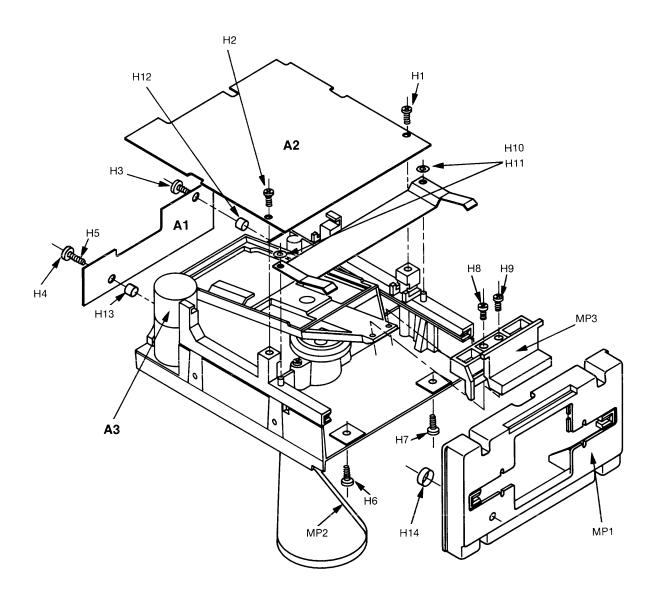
A9 or A10 Flexible Disc Drive Exploded View
